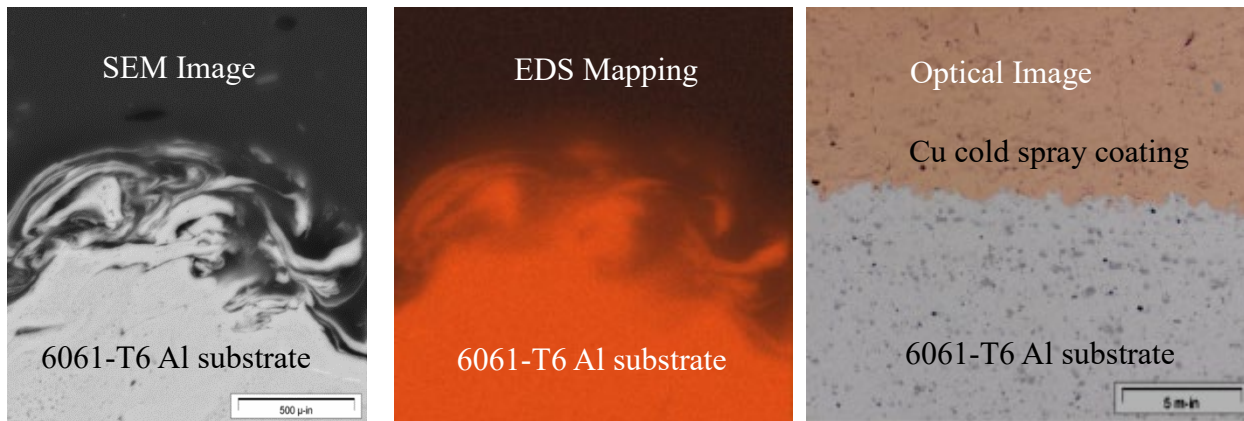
Mechanical interlocking of a Cu coating applied by cold spray onto 6061 AL-T6.
